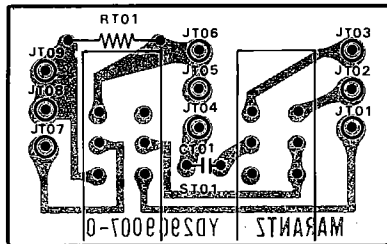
Mono HI Blend Assembly PT01 Component Locations
